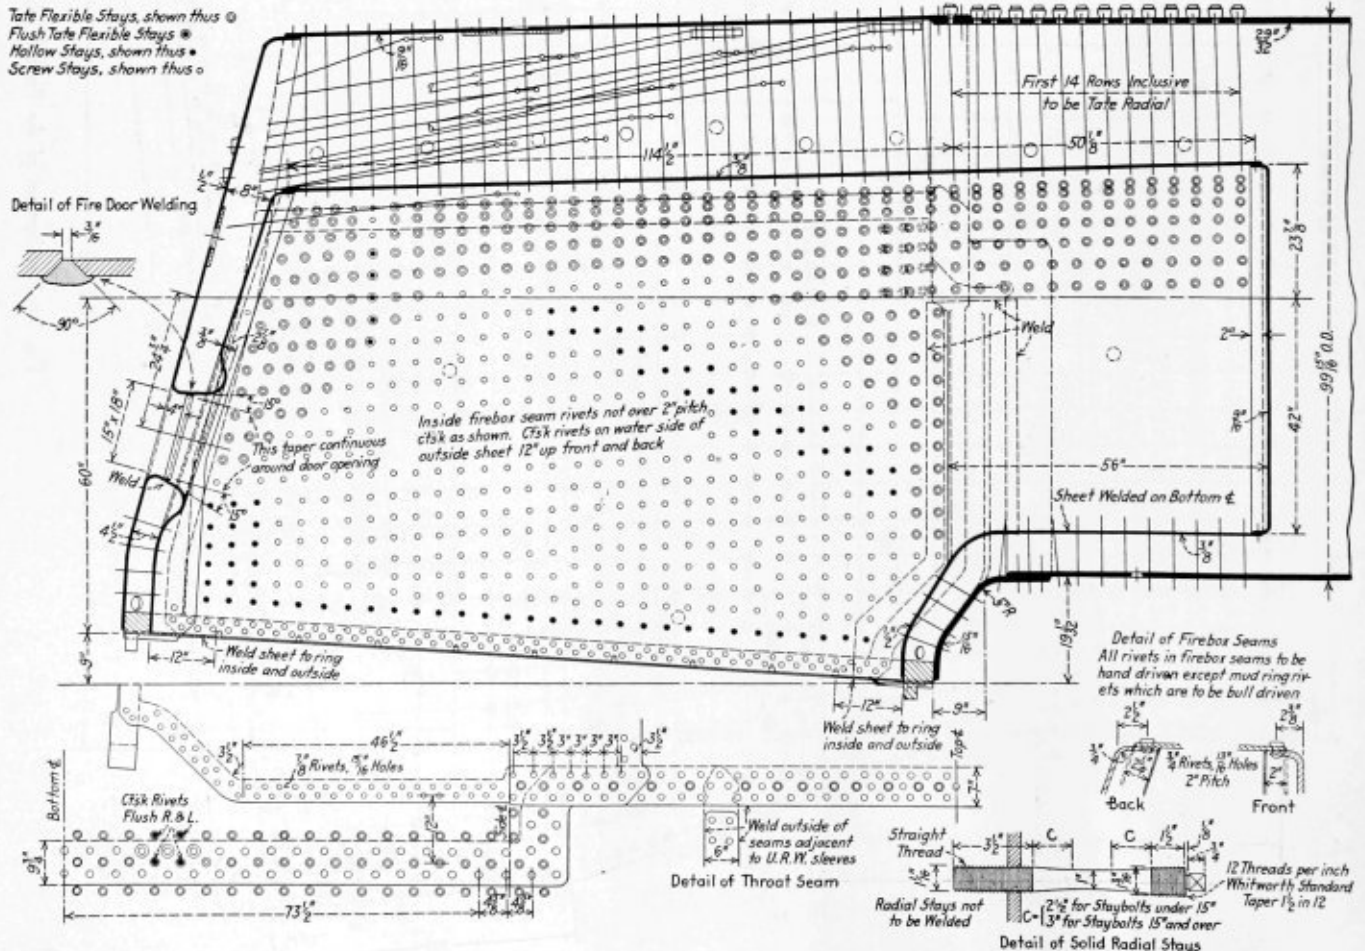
Arrangement of Firebox and Combustion Chamber, Showing Staybolt Installation, Together with Throat Seam Details
